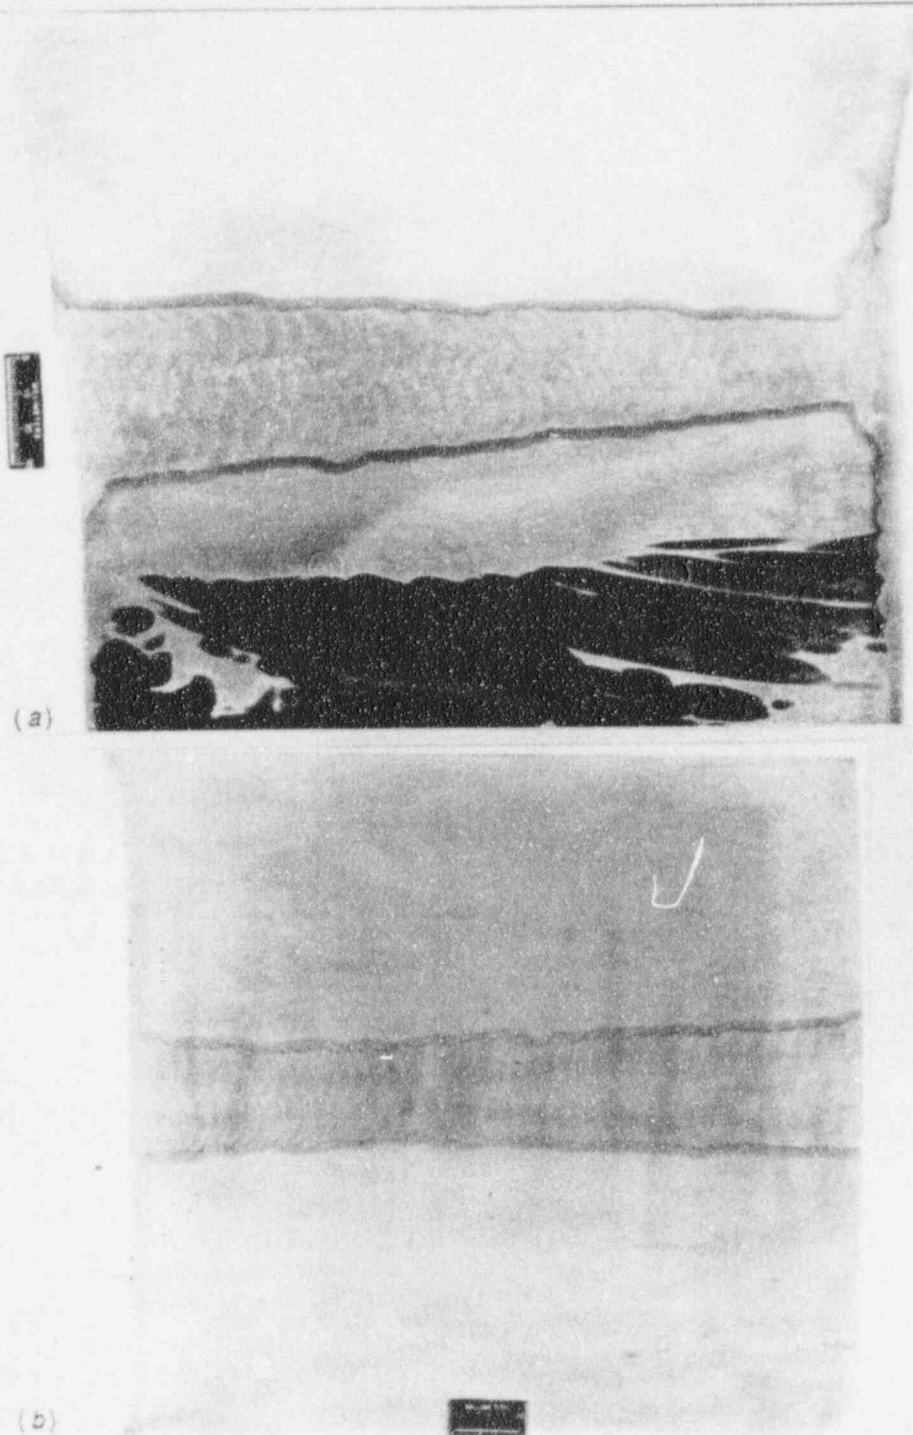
Details of welds used in full-thickness clad beam studies: (a) axial weld and (b) circumferential weld
